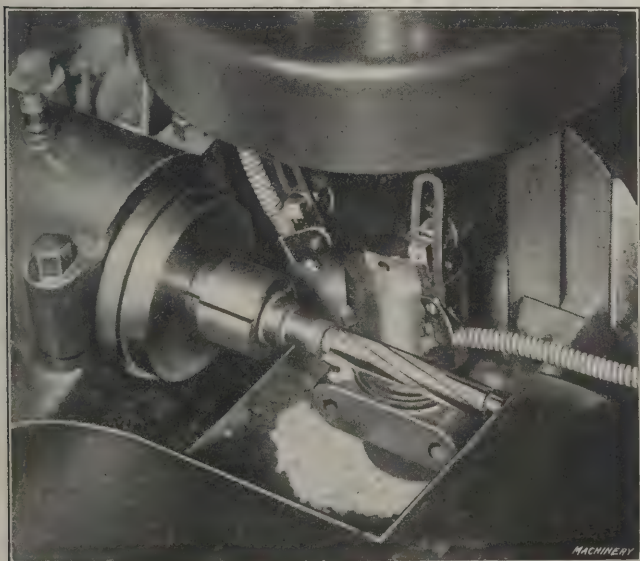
Method of Hobbing Shaft in Lees-Bradner Hobbing Machine
